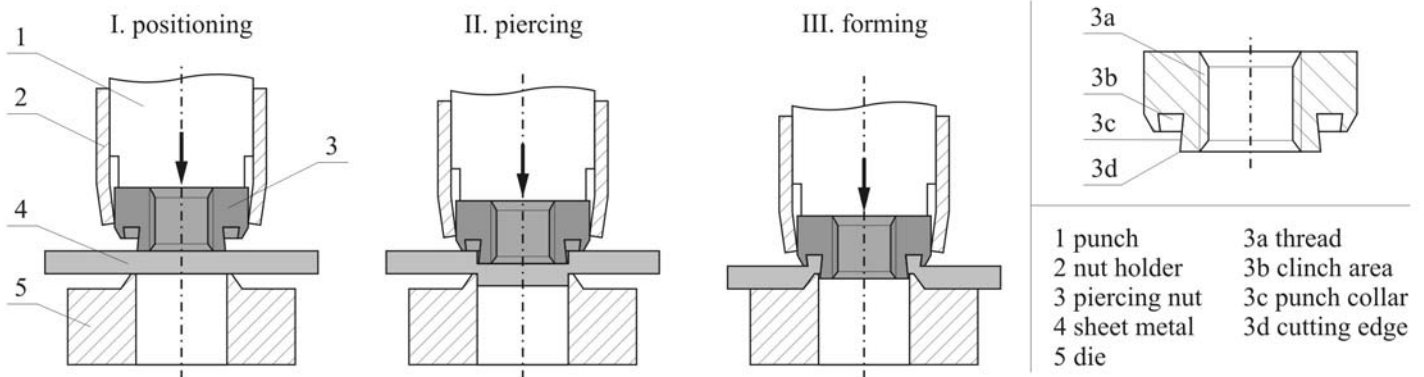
Process steps - setting of self piercing nuts (schematic)
